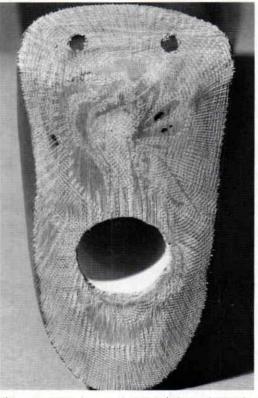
KEEL area sanded and ¼" holes drilled for bonding sole to KEEL.
